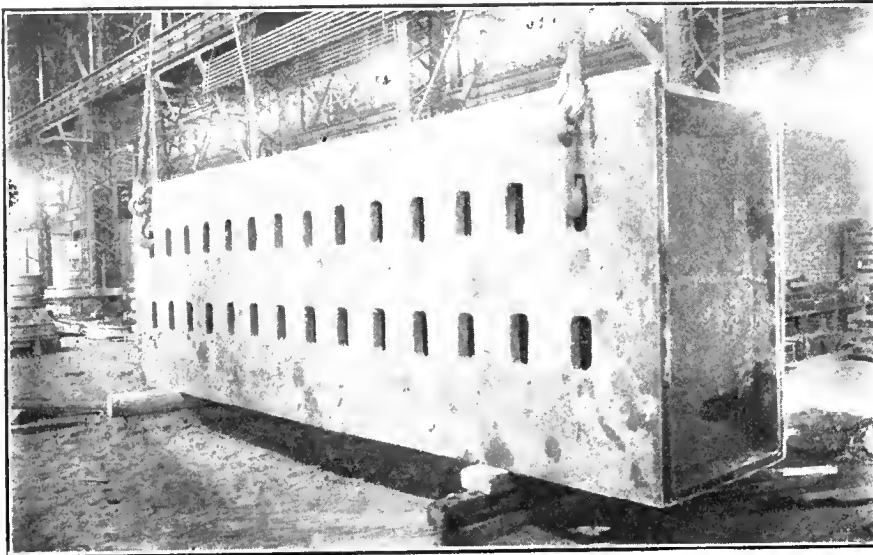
STEEL CASTING TO FORM PART OF BRIDGE PIER.
